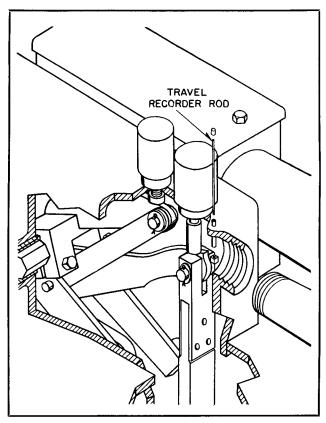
Inserting Travel Recorder Rod Through Pole Unit Mechanism Housing
